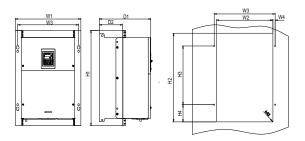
Flange mounting of 3PH 400V 90–110kW VFDs Dimension (unit: mm)
